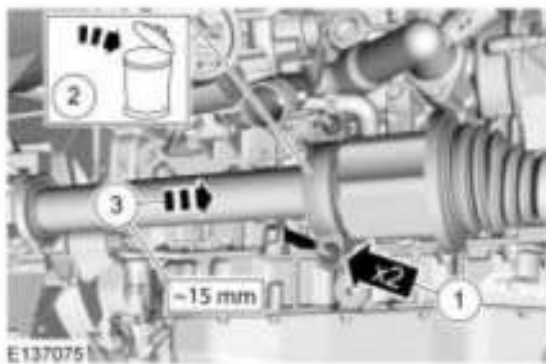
Locating Intermediate Shaft Disposal Lower Nut And Clamp
